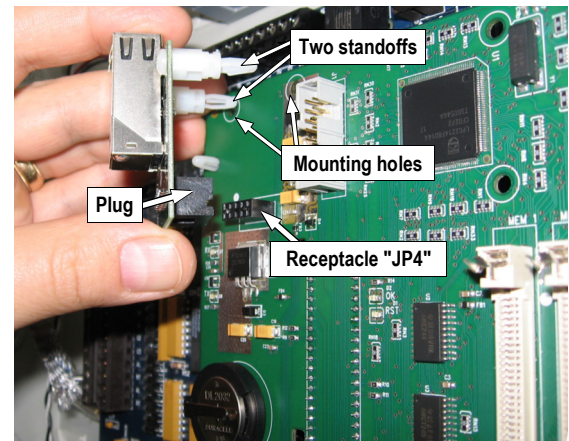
Align the two snap-lock standoffs and plug with the Accelerator board holes and receptacle
